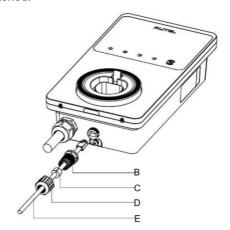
Installing the Waterproof Ethernet Cable Gland
